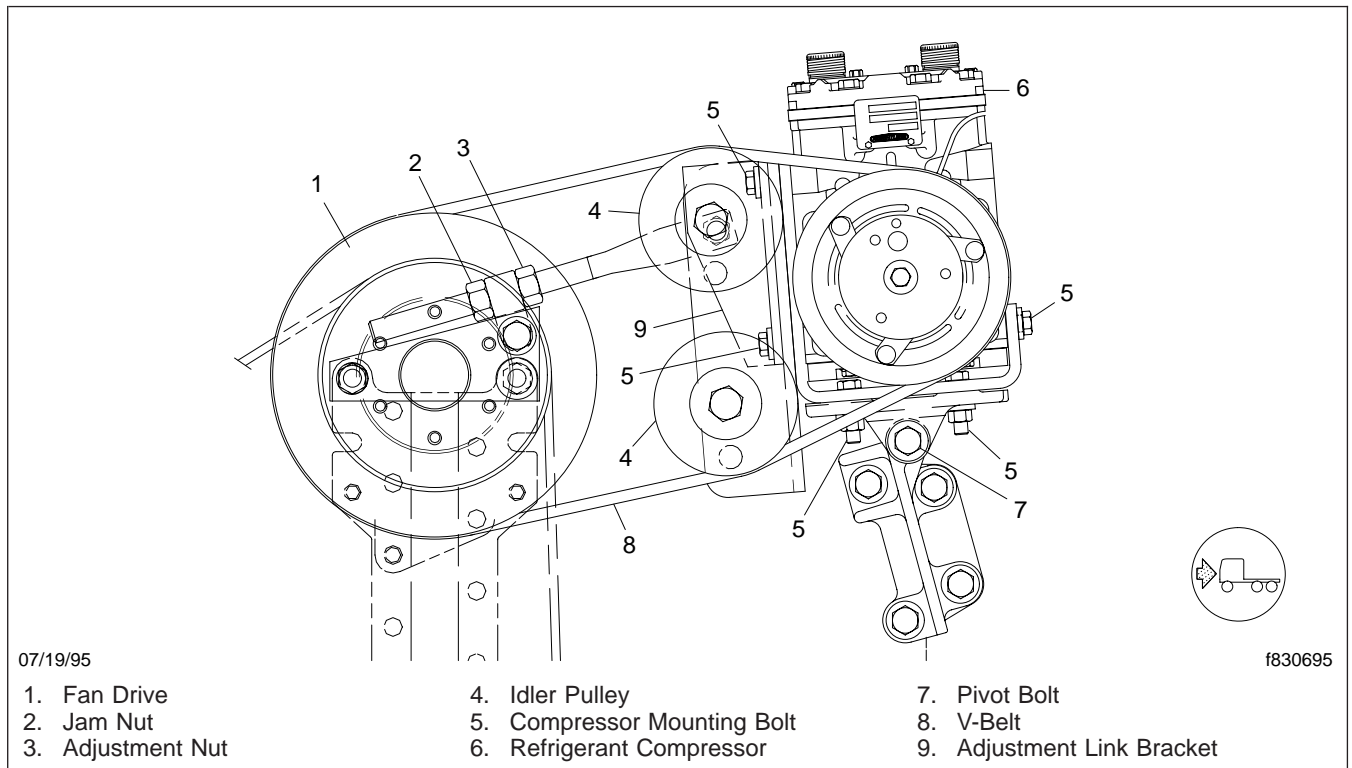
, Compressor Mounted on a Caterpillar Engine (typical installation)
